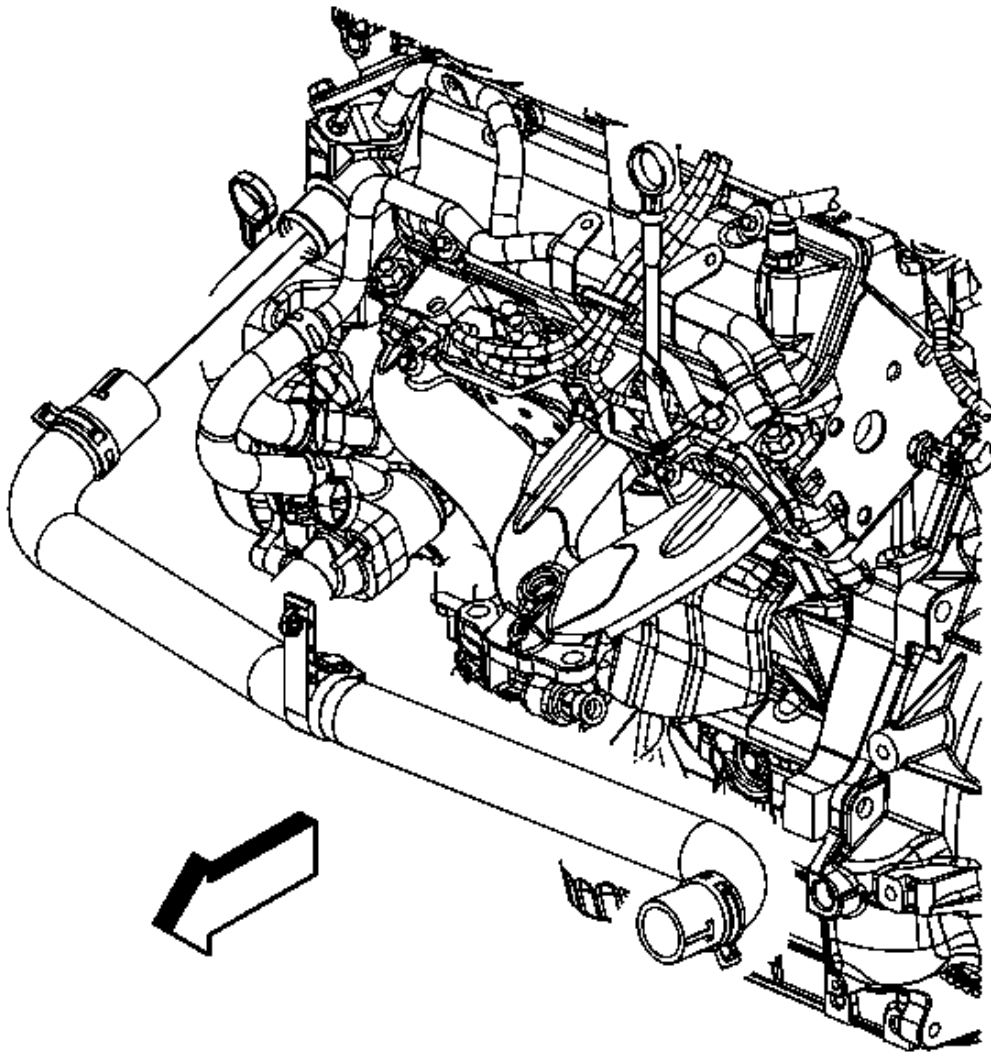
Identifying Radiator Inlet Hose & Crossover Pipe
